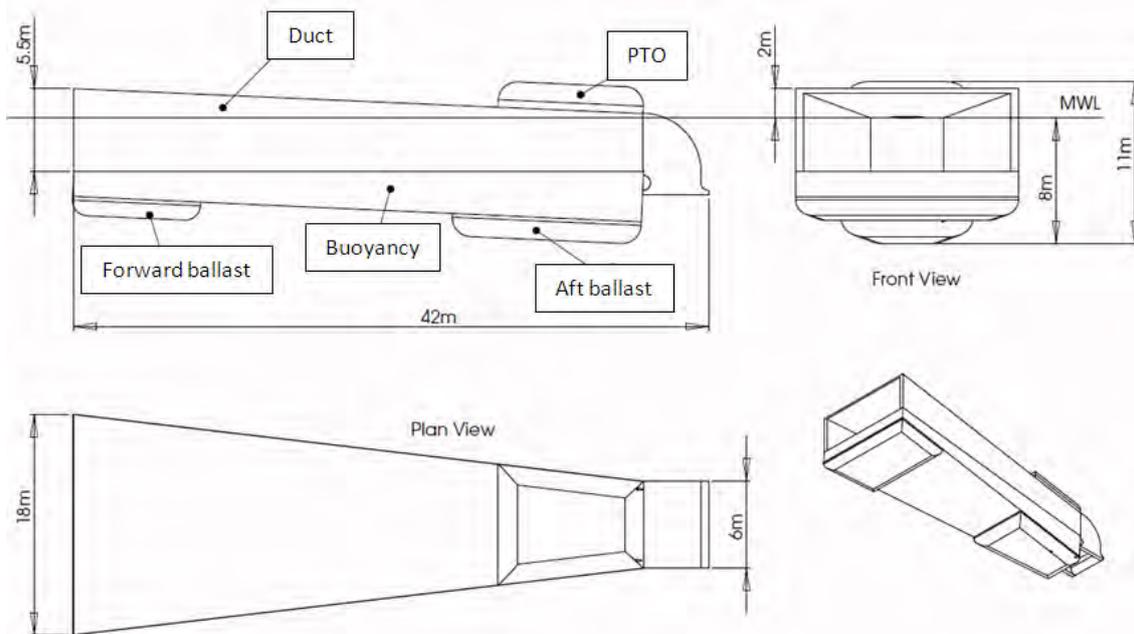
, The general assembly drawings of the initial design of the OWEL demonstrator.
